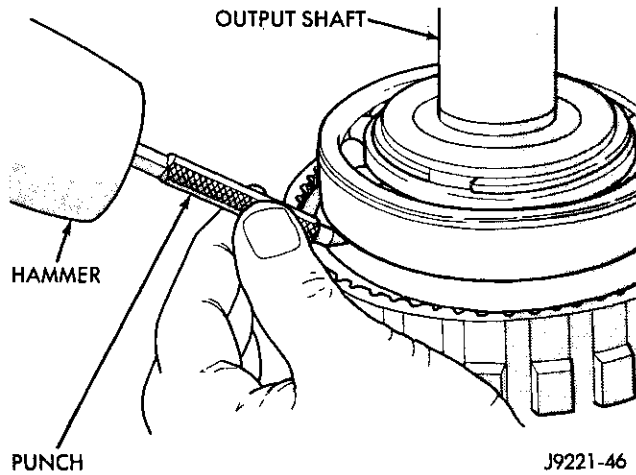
Marking Annulus Gear And Output Shaft For Assembly Alignment
